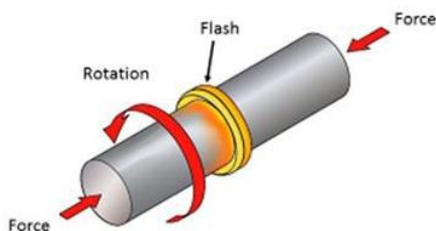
Rotary Friction welding (Twi Group Websites, The Welding Institute)
